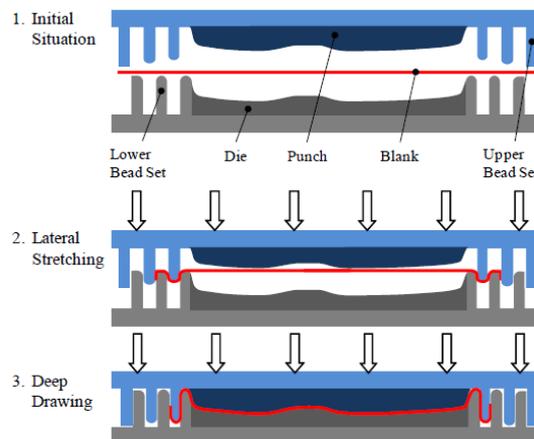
Schematic view of the drawing process by SCS Tool [27]
